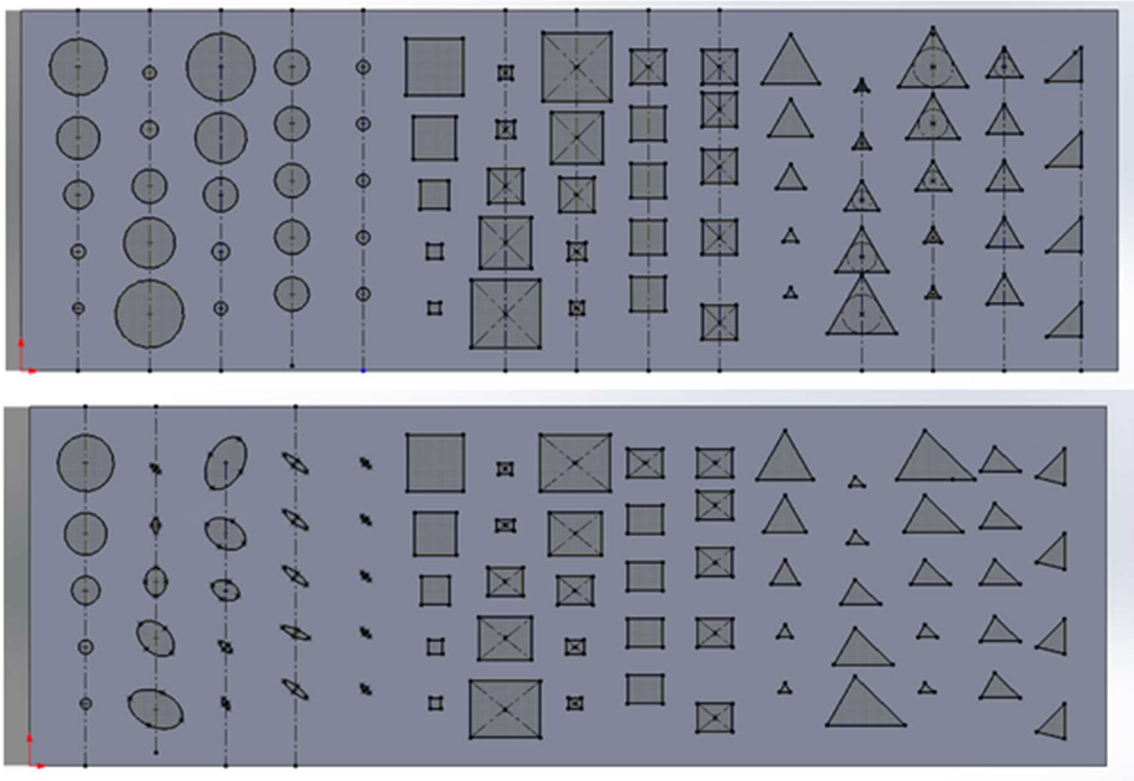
First and third-layer of CAD part, note the change of dimensions/geometries between layers
